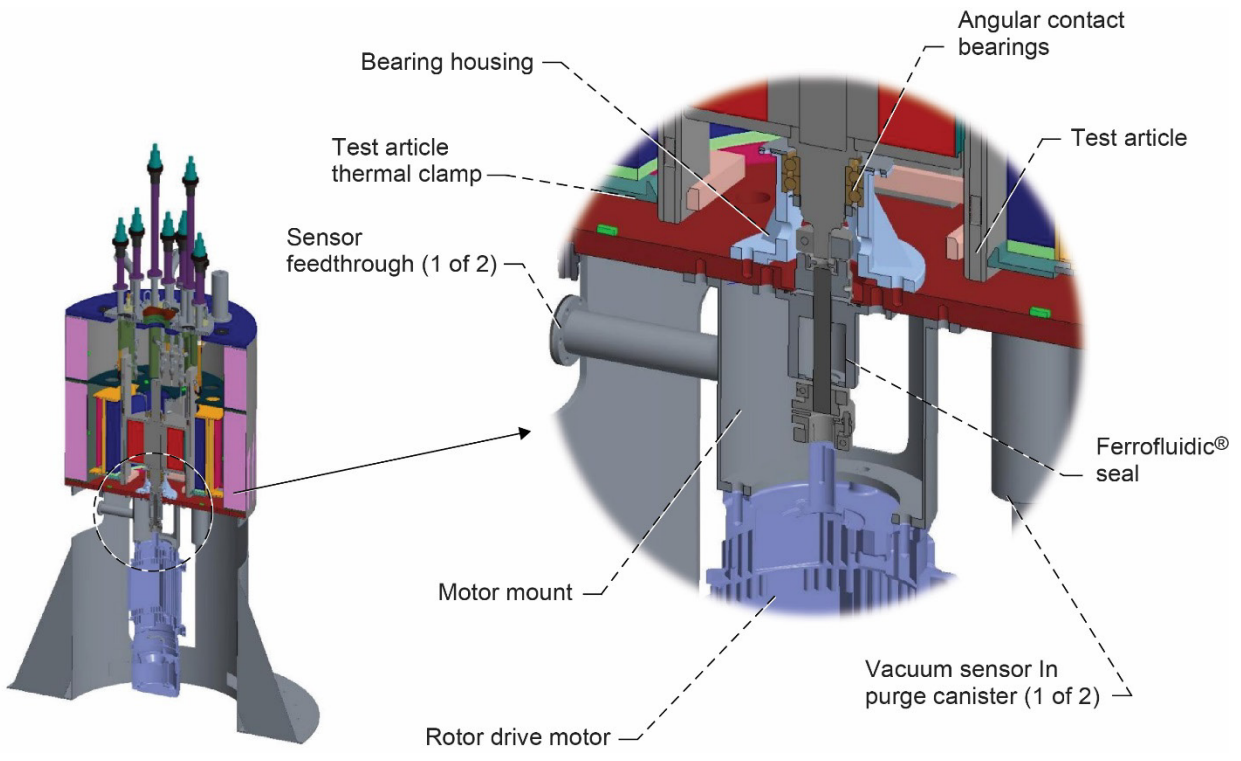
Core test rig near rotor and vessel interface mechanical layout, where TA is test article.
